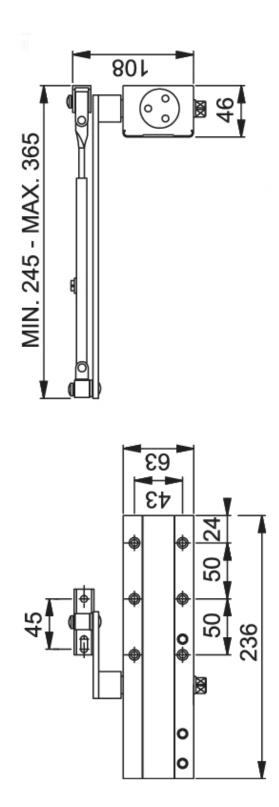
Item 18 – Door Closer AR5500SD-SE Drawing
